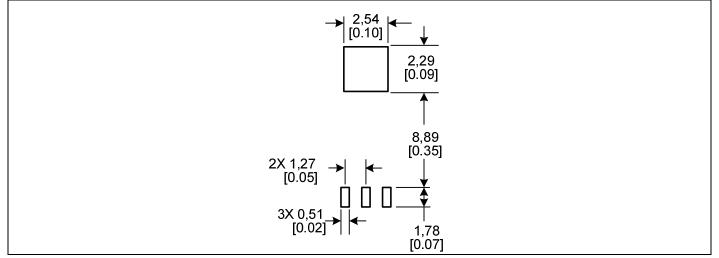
HIH-4031 MOUNTING DIMENSIONS (For reference only. mm/[in])
